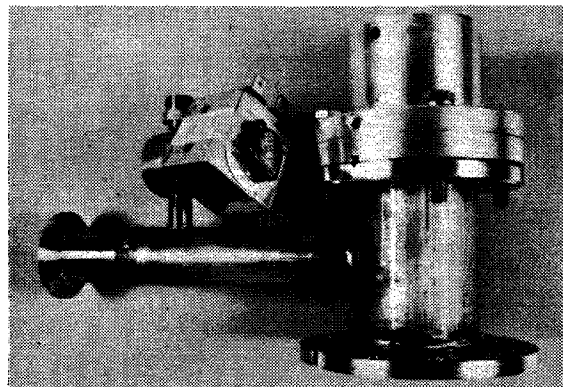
Pneumatic Actuator (Ready for Bolt Tightening—Note Gap)
